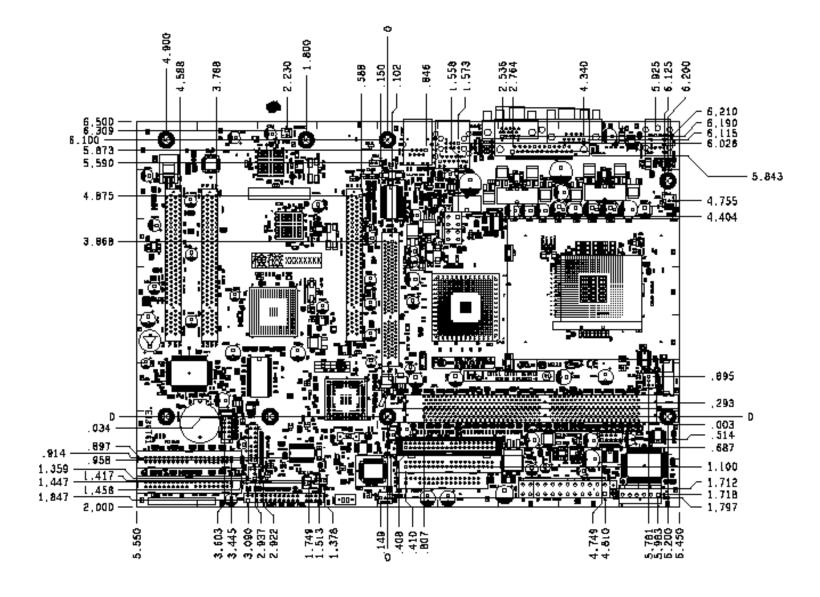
S845WD1, S845WD11U Server Board Mechanical Drawing
